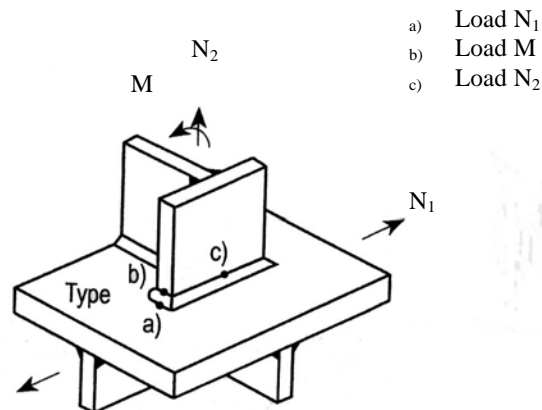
Types of weld toe failure seen in welded plate structures (Figure from Fricke [1]).
